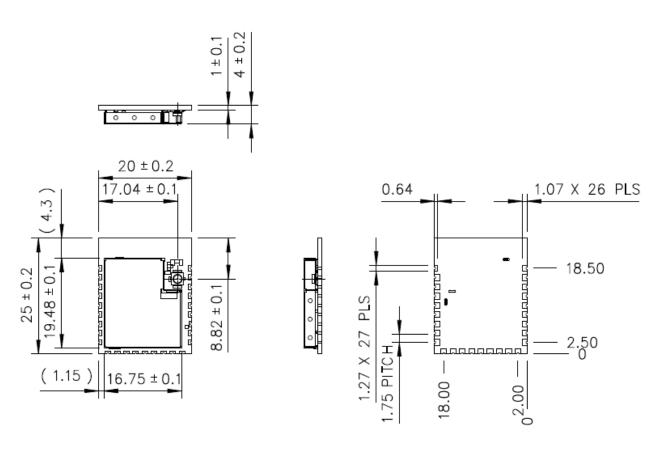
Mechanical drawing with shielding Note: MP version default is without U.FL connector
